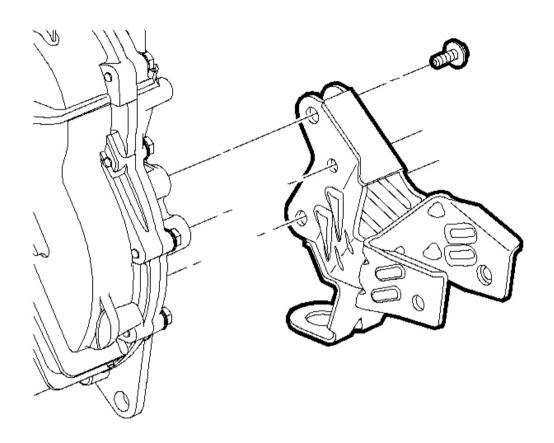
Rear Transmission Mount Bracket & Bolts Courtesy of GENERAL MOTORS CORP.
